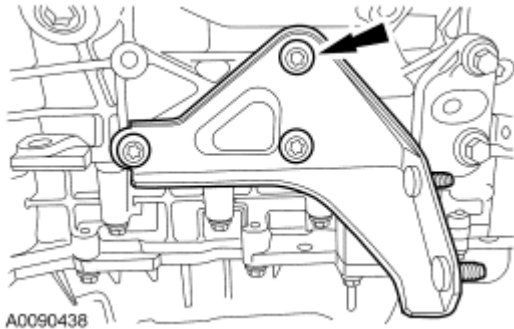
Locating Halfshaft Support Bracket & Bolts
